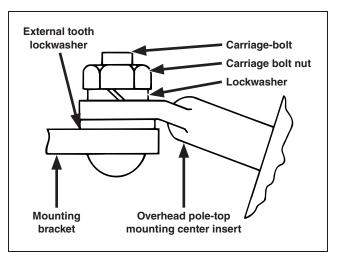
Attaching an overhead pole-top style VacuFuse II interrupter cutout mounting to the mounting bracket.
